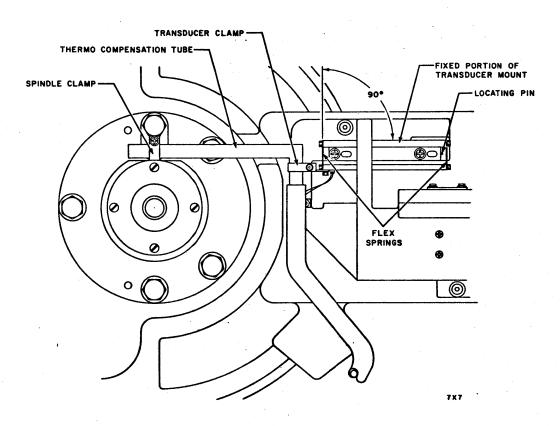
Fixed Transducer and Thermo Compensation Tube Installation
